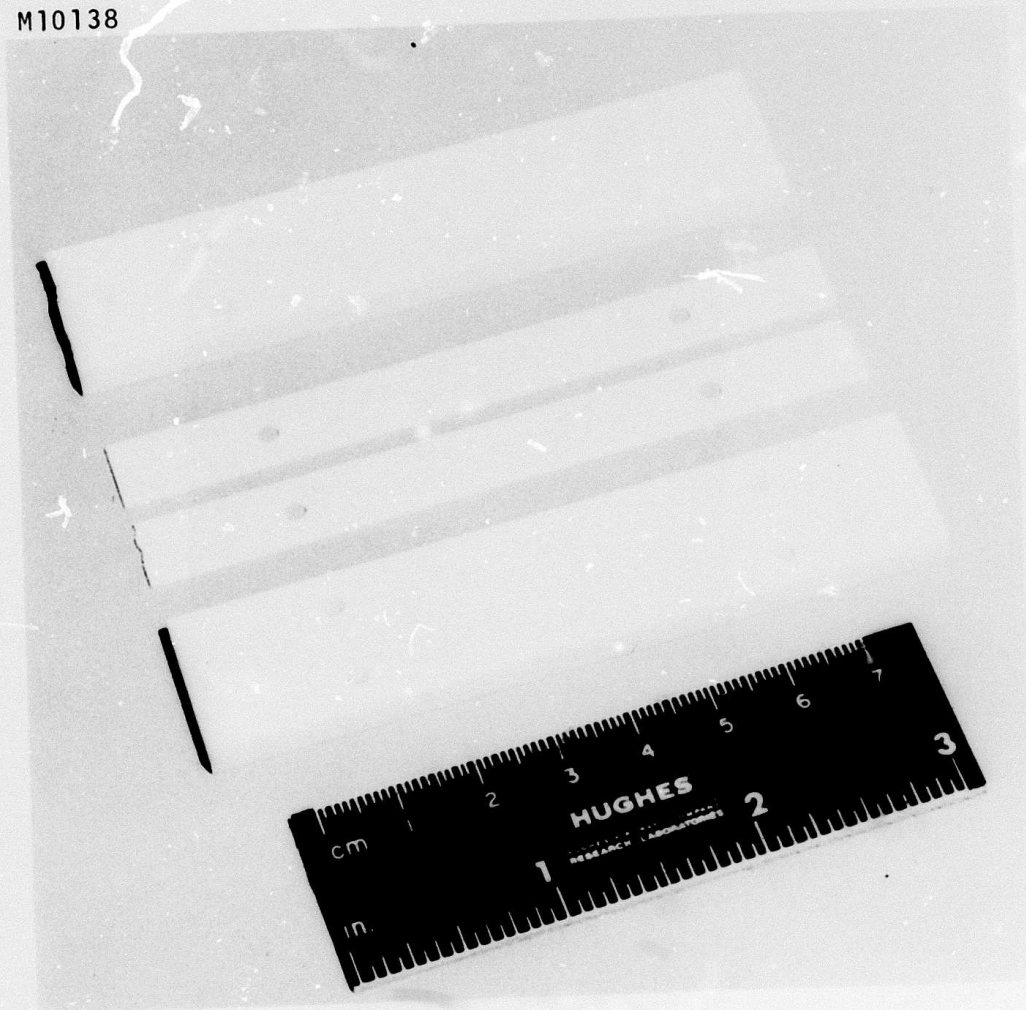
Pieces used to fabricate 1.0 mm square bore tube.
